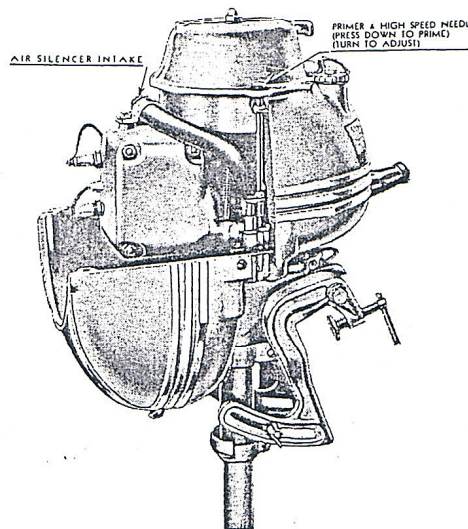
Showing Cover Down for Inspection of Spark Plugs—Models DS & DT
